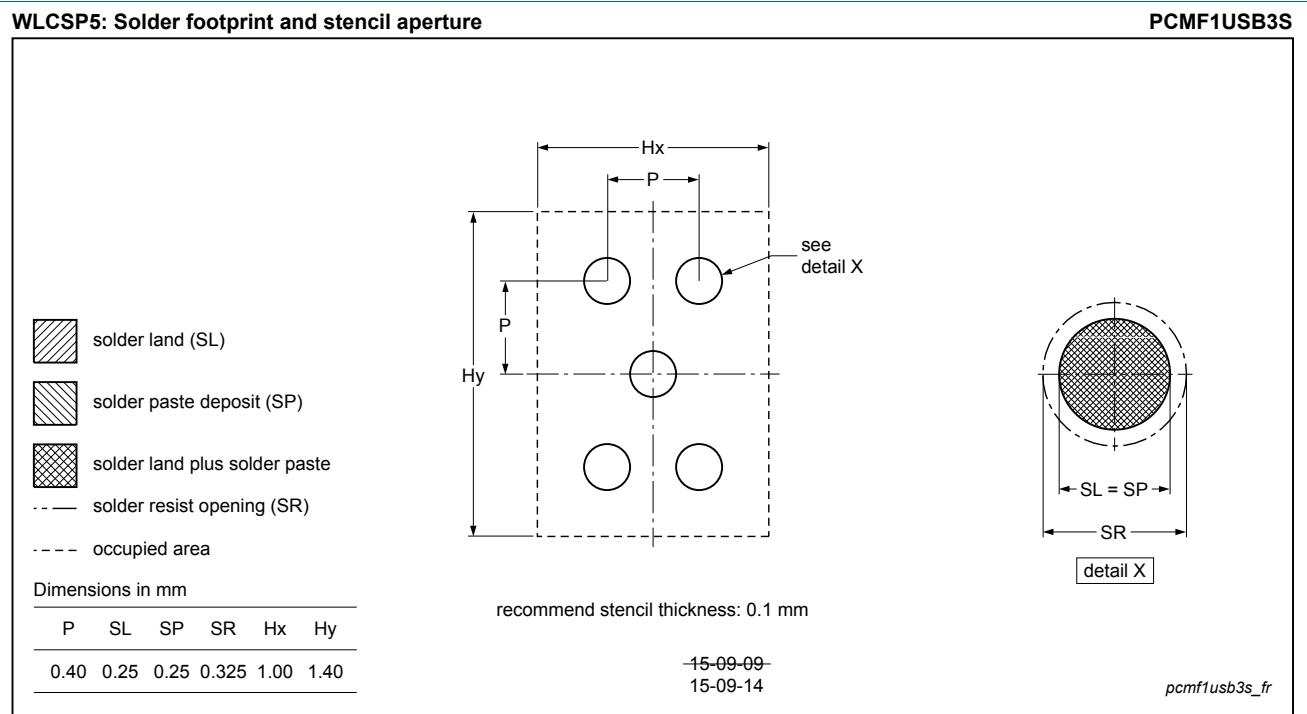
Soldering footprint WLCSP5 (PCMF1USB3S)
